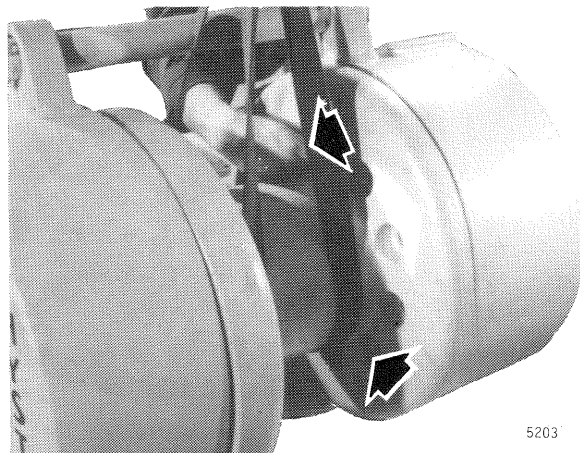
REMOVAL OF DRUM SHAFT AND DRUM (Sheet 1 of 3)
